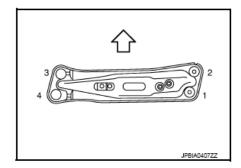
Identifying Tightening Sequence Of Rear Engine Mounting Member Bolts Courtesy of NISSAN NORTH AMERICA, INC.
